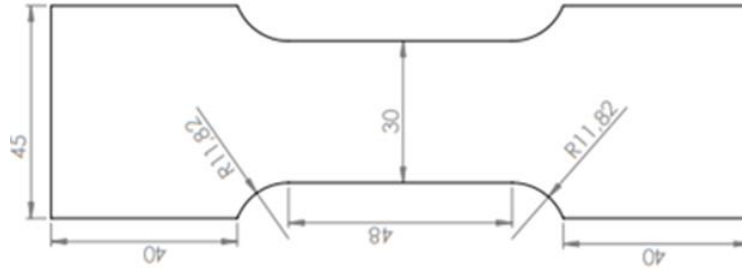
Dimensions of the dumbbell sample that will be destined for tensile and fatigue tests.
